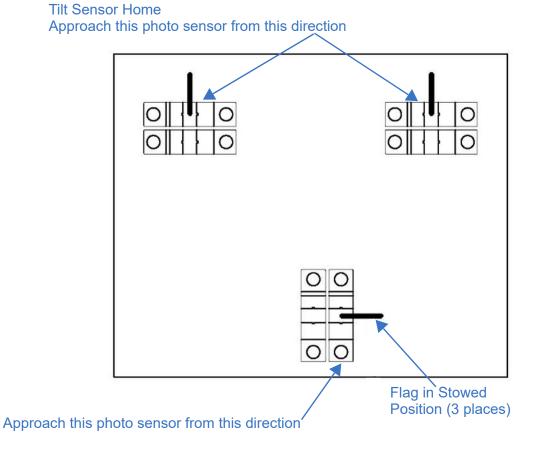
RCP PCB Photo Sensors (Dual-Tilt)
